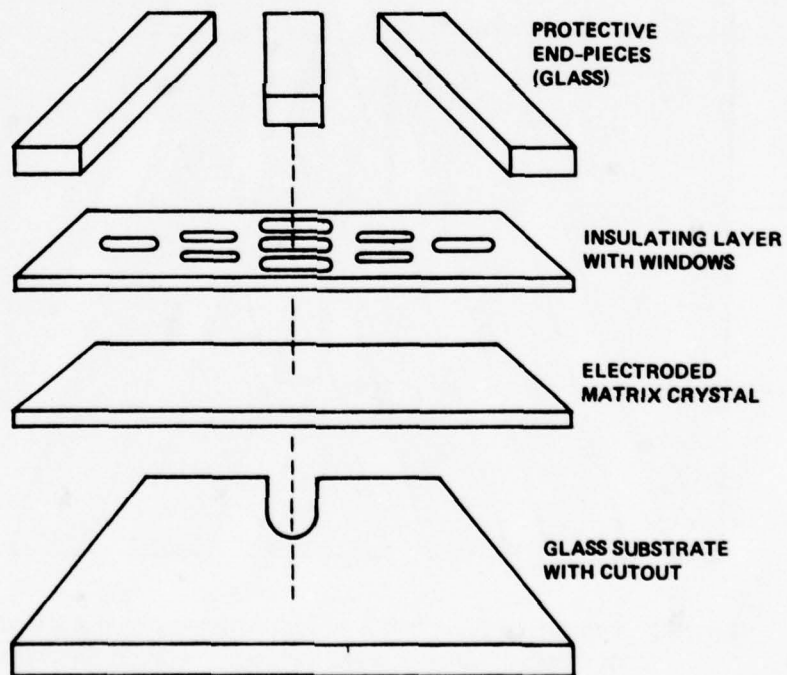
Exploded view of angle-terminated matrix illustrating how the device is put together.
